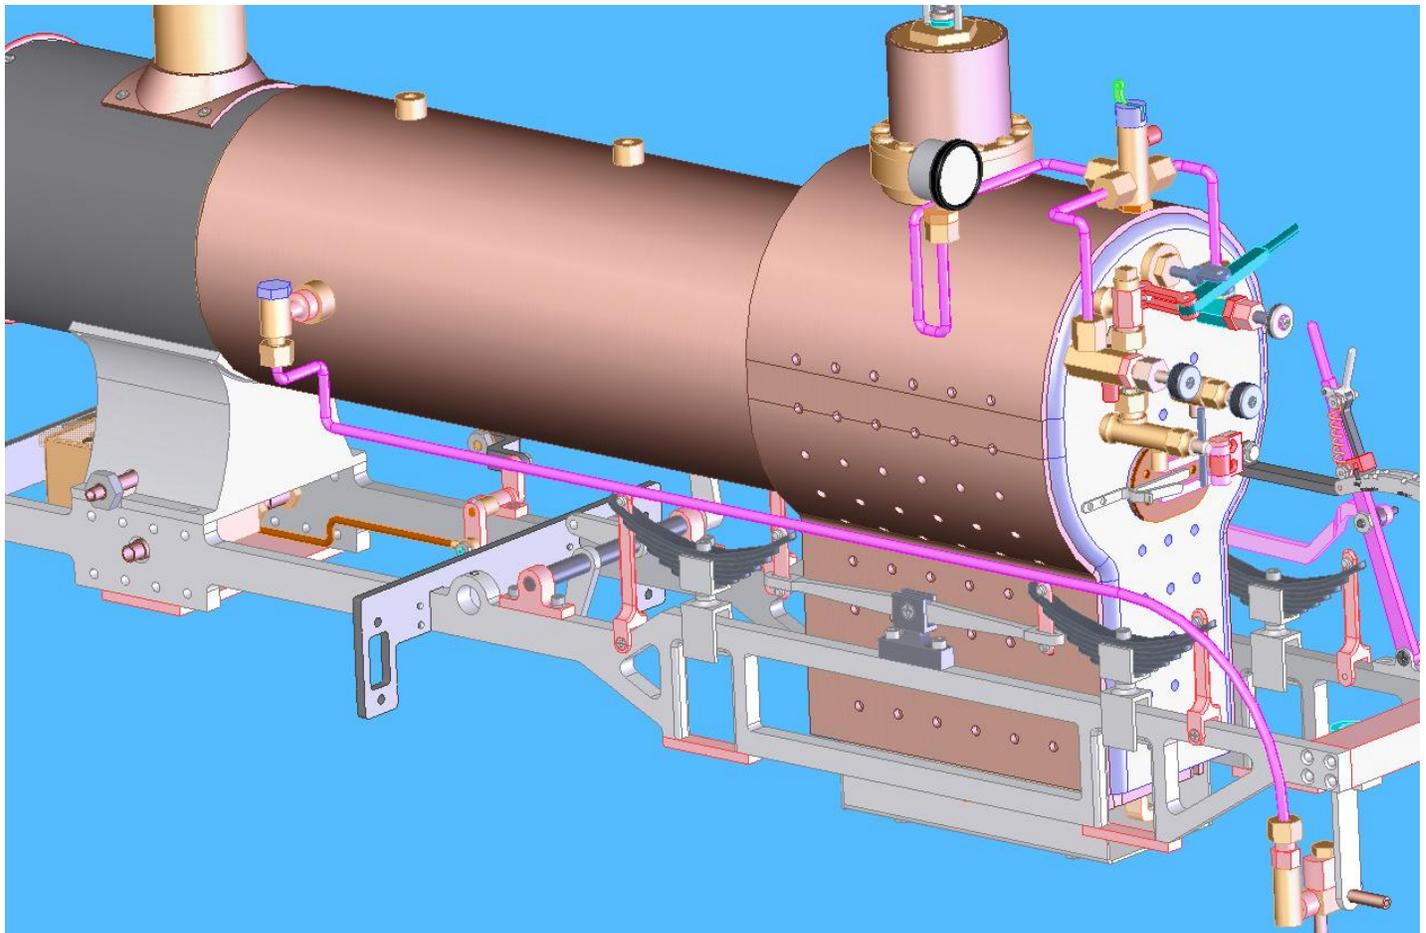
L.H. Check Valve to Injector pipe work shown with pink tubing.
